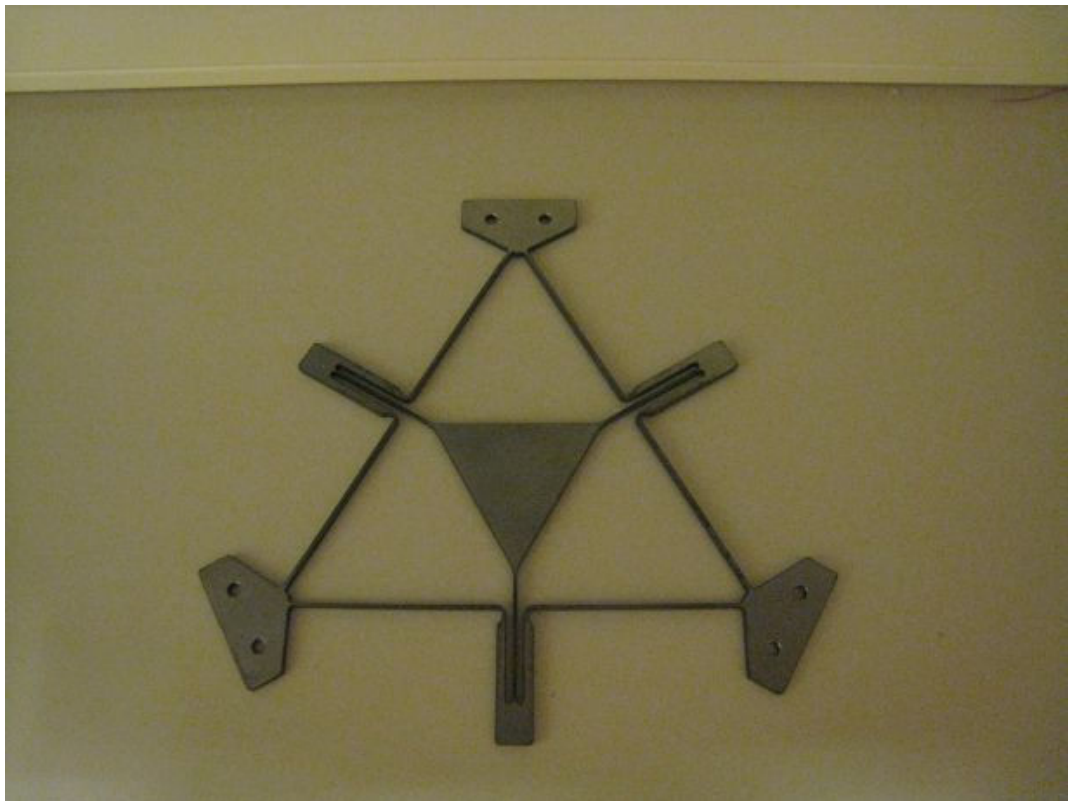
Black steel water jet cutting manufactured compliant mechanism
